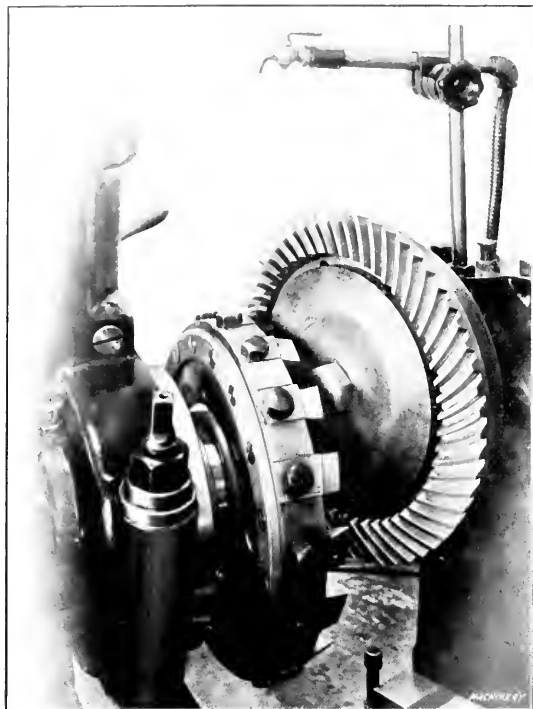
Close View of the Cutter generating the Teeth in a Gear
